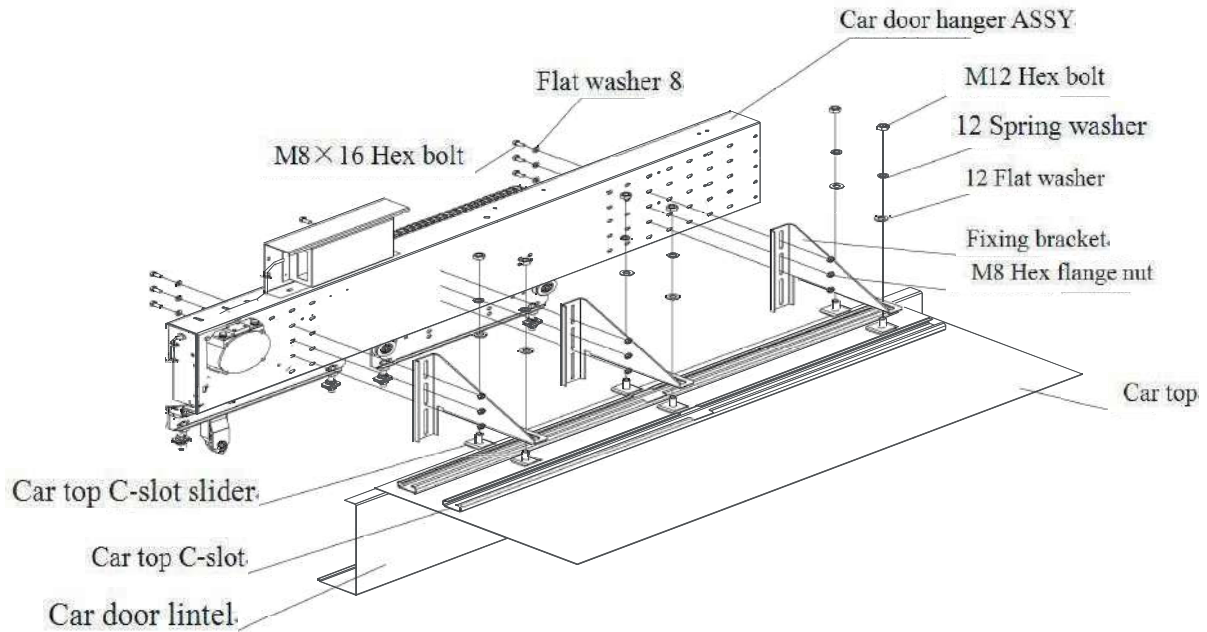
Car door hanging components installation (2 Panels side opening)
